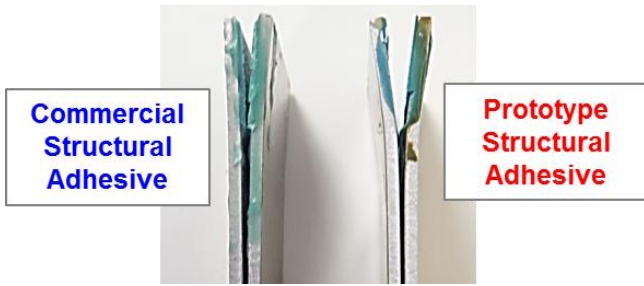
A comparison of the AA2024 substrate deformation after failure of structural adhesive lap joints.
